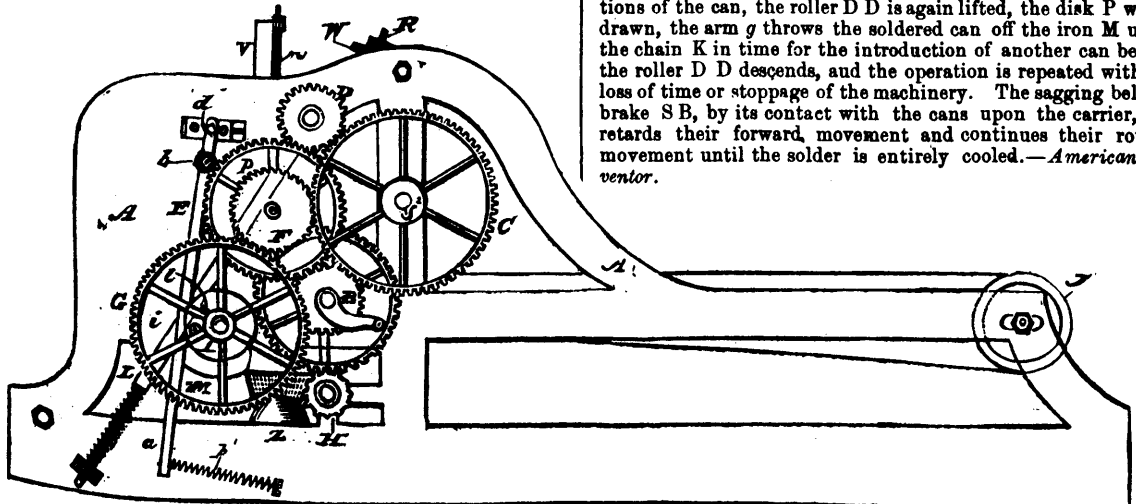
AUTOMATIC SOLDERING MACHINE.
